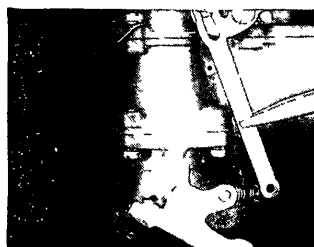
Install fast idle connector link, spring and retainer at lower end
